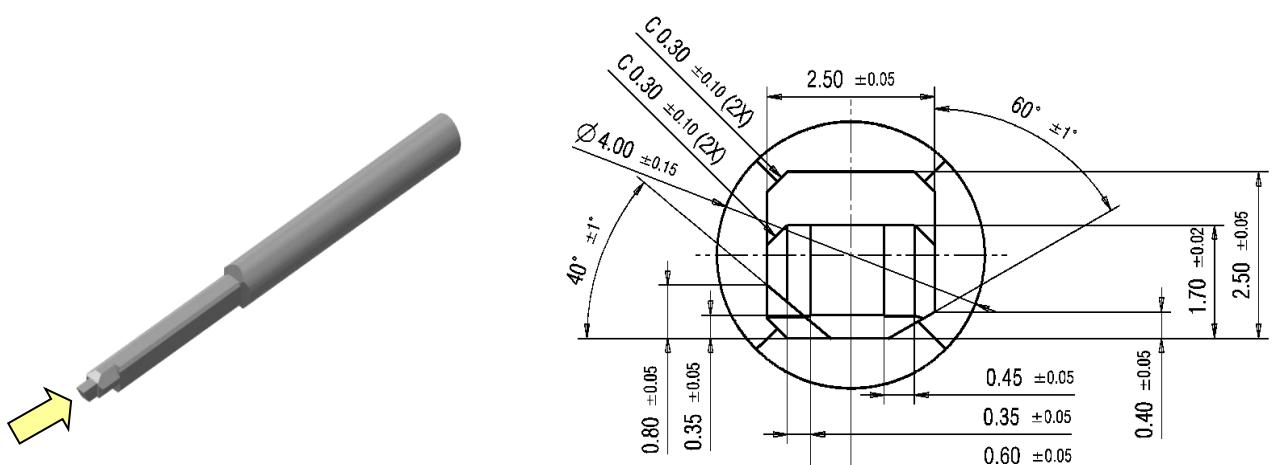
1.2 terminal removal tool / Outil d'extraction des contacts 1.2
